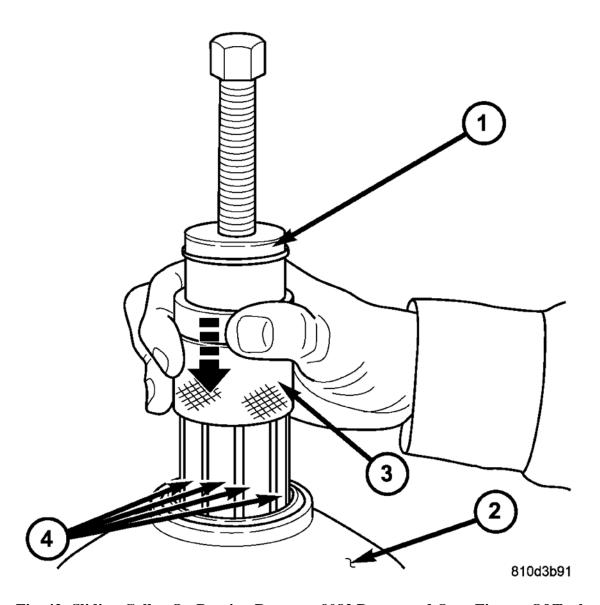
Sliding Collar On Bearing Remover 9082 Downward Over Fingers Of Tool Courtesy of CHRYSLER LLC
